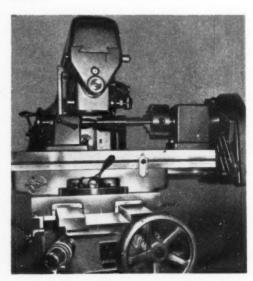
Application of an attachment for milling worms on a Rigiva horizontal milling machine by means of a disc-type cutter
